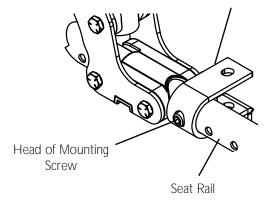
Install the Seat Pan - Flush Mount - Install Crossbrace Tube
